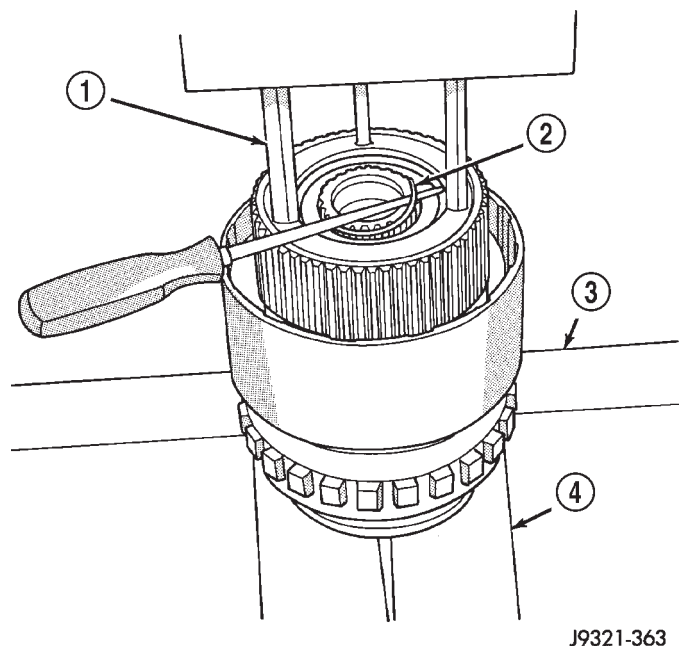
Direct Clutch Hub Retaining Ring Removal
